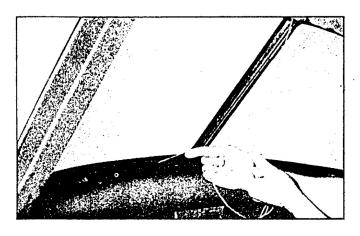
Raising Inner Lip of Channel Over Pinch-Weld
